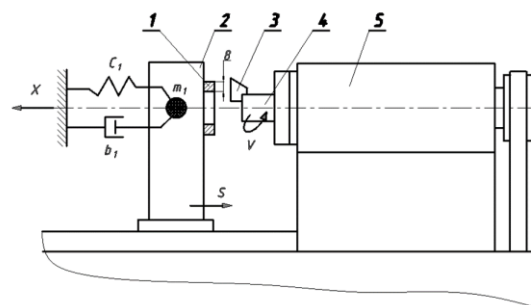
Diagram of machining the ends of a workpiece with a wide-bladed cutter
